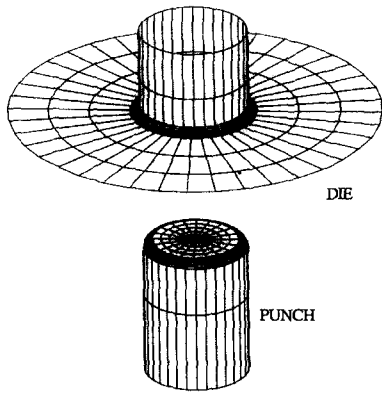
Schematic view of tool surfaces for cylindrical deep drawing
